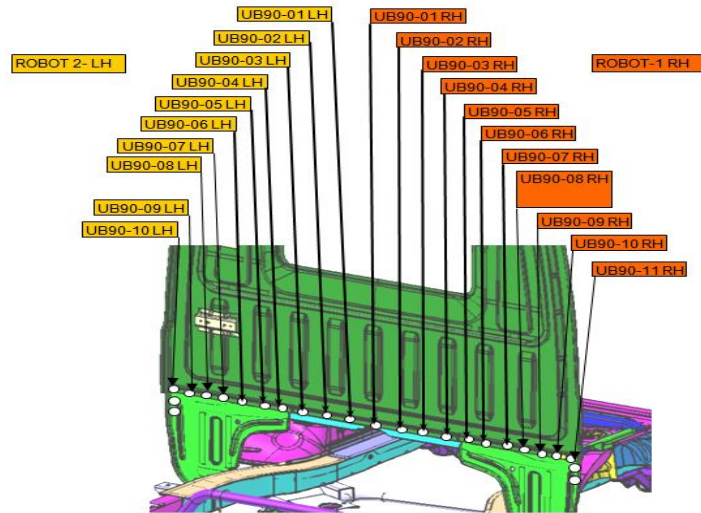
(b) Location of weld Spots on Back Panel.
